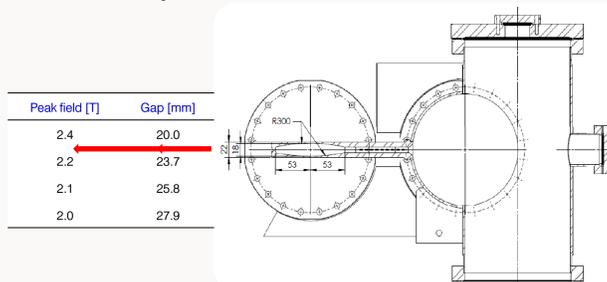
The vacuum chamber dimension and operating gap (mm)
